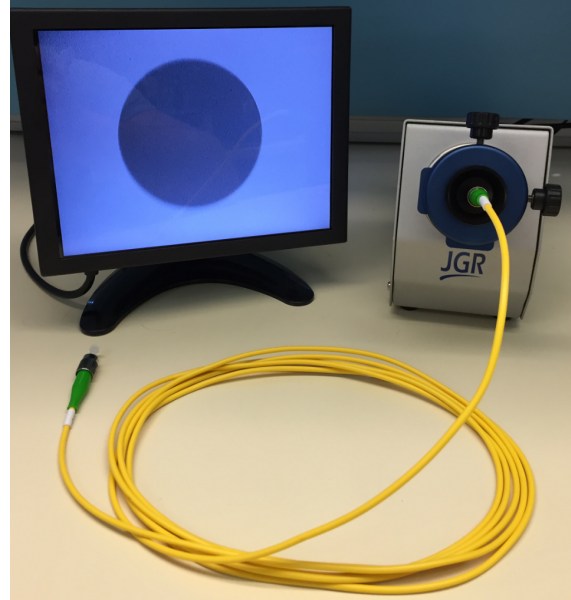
Clean connector end-face inspection using SANTEC's EFI-100
